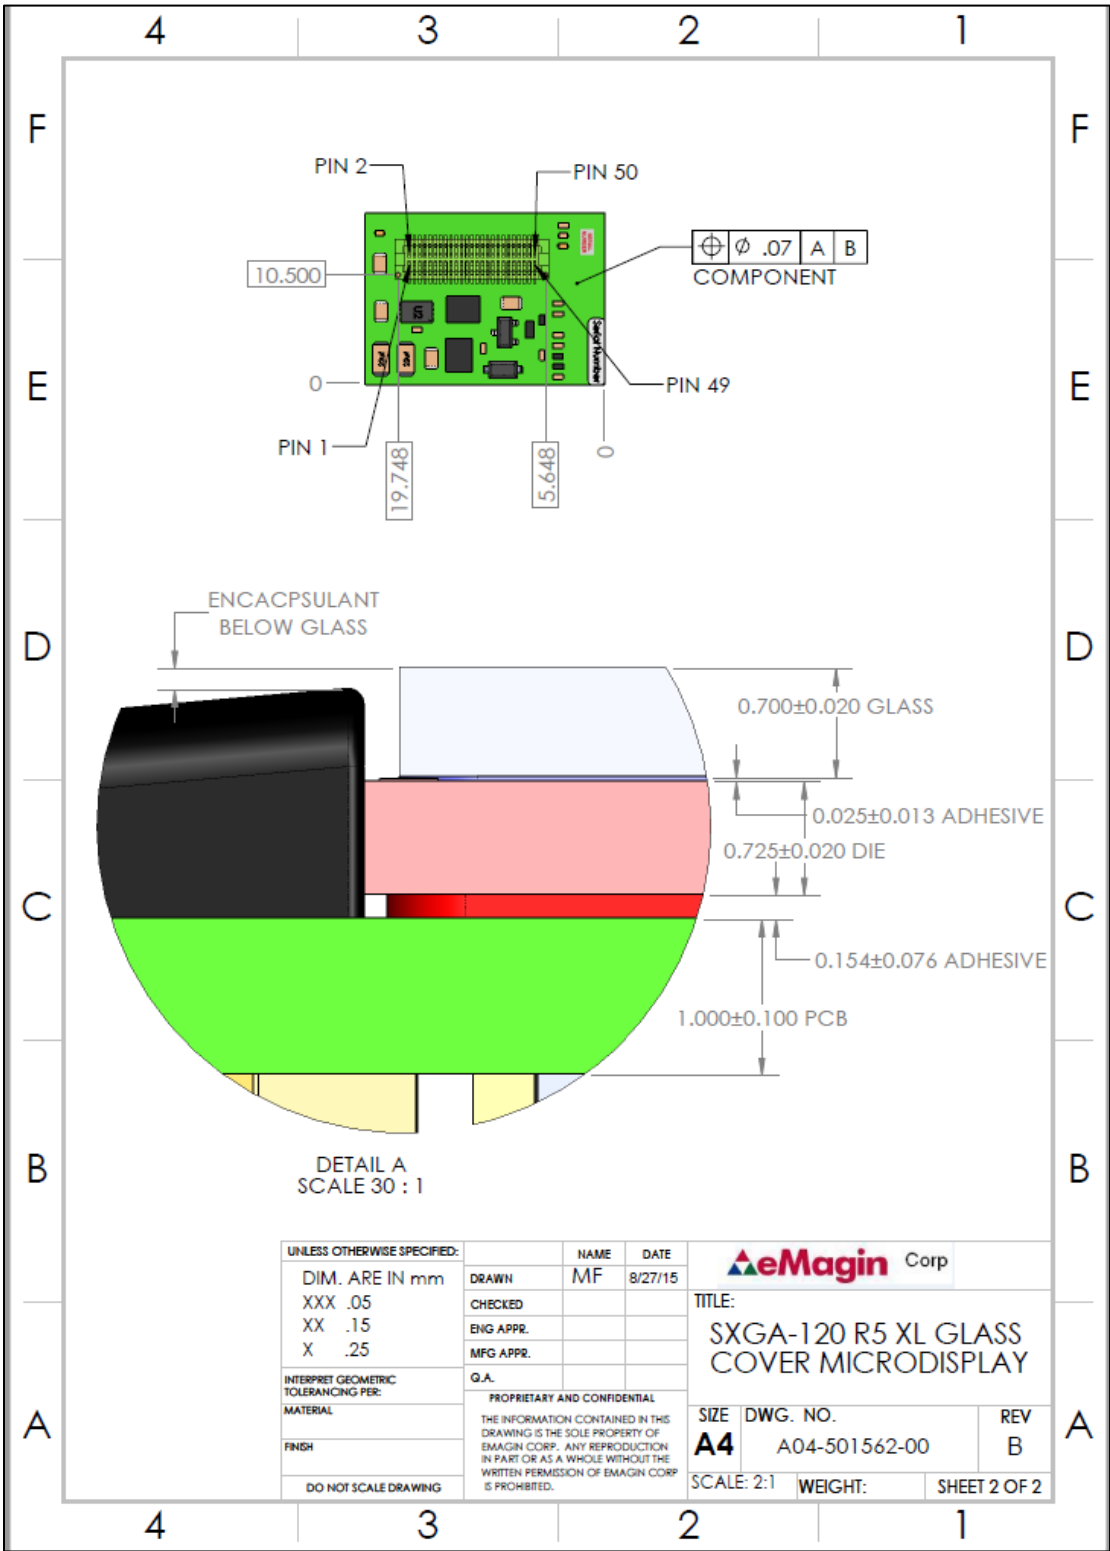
SXGA-120 R5 Assembly Drawing with 0.7mm Glass Cover (A04-501562-00)
